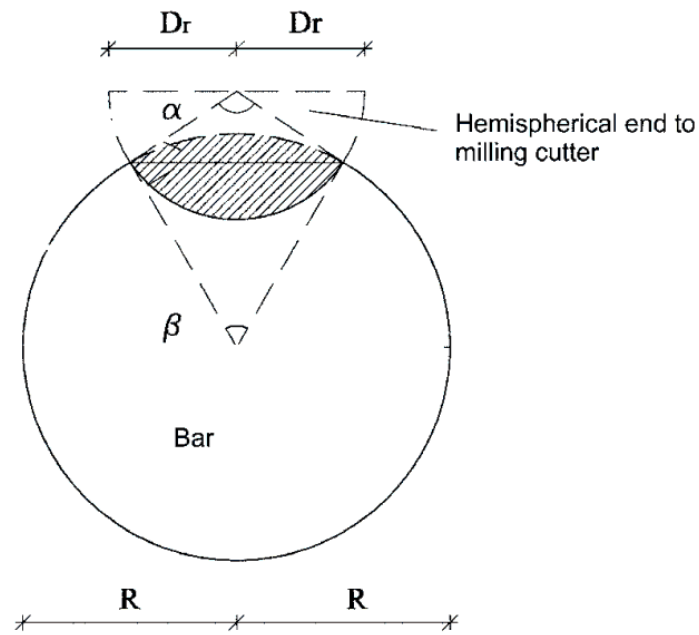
Schematic of machined defect geometry[2]
